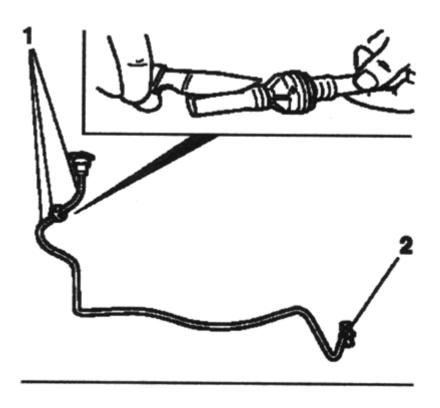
Disconnecting vacuum Magicians strali: 1 - elbow pipe, 2 - latch mounting vacuum line
